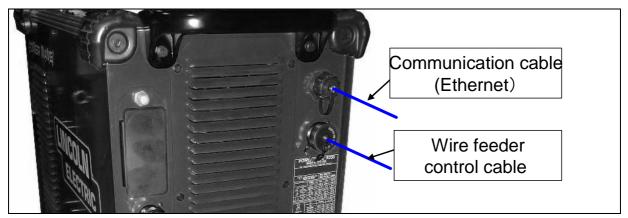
(b) Connection of welding power supply Power Wave R350 (2/4)
